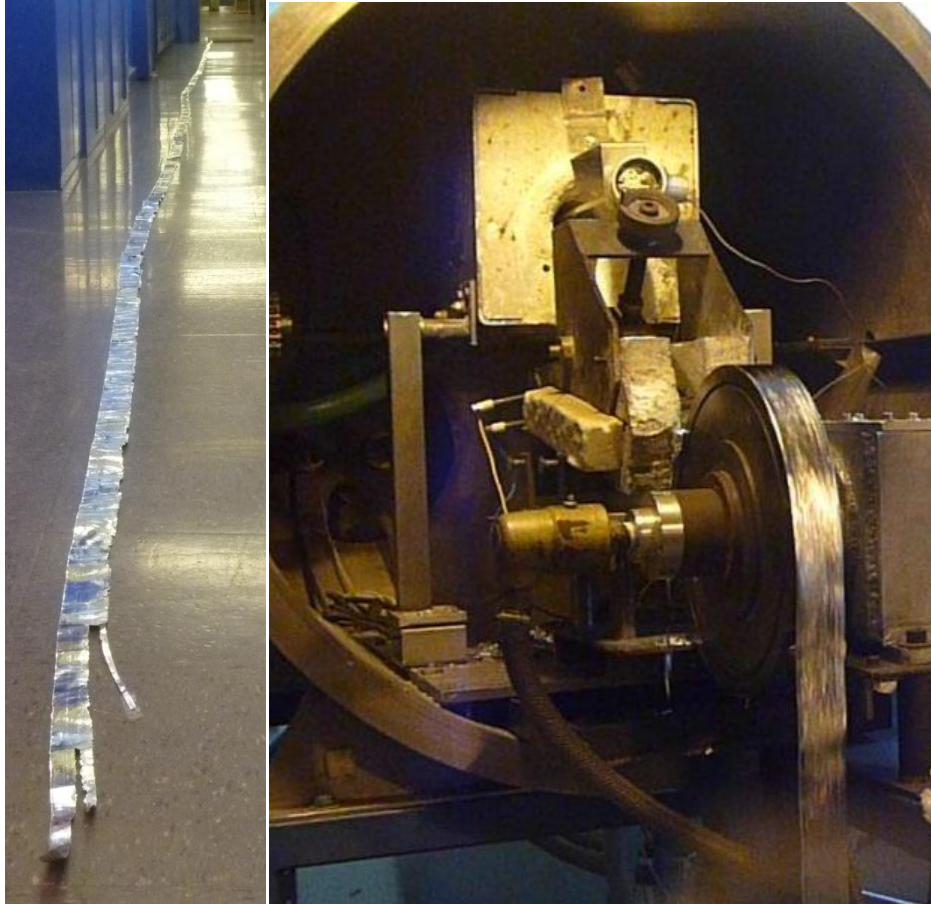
Picture of the 20 meter long steady state ribbon cast, with Sn, 350 μ m thickness (left), and its casting operation, extracted from the casting movie (right).
